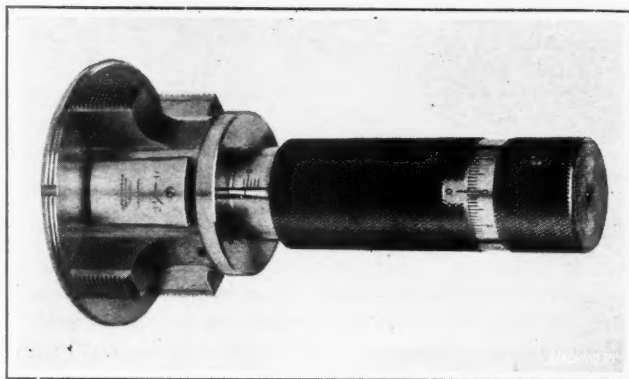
Bath Internal Thread Micrometer with Threaded Pilot
